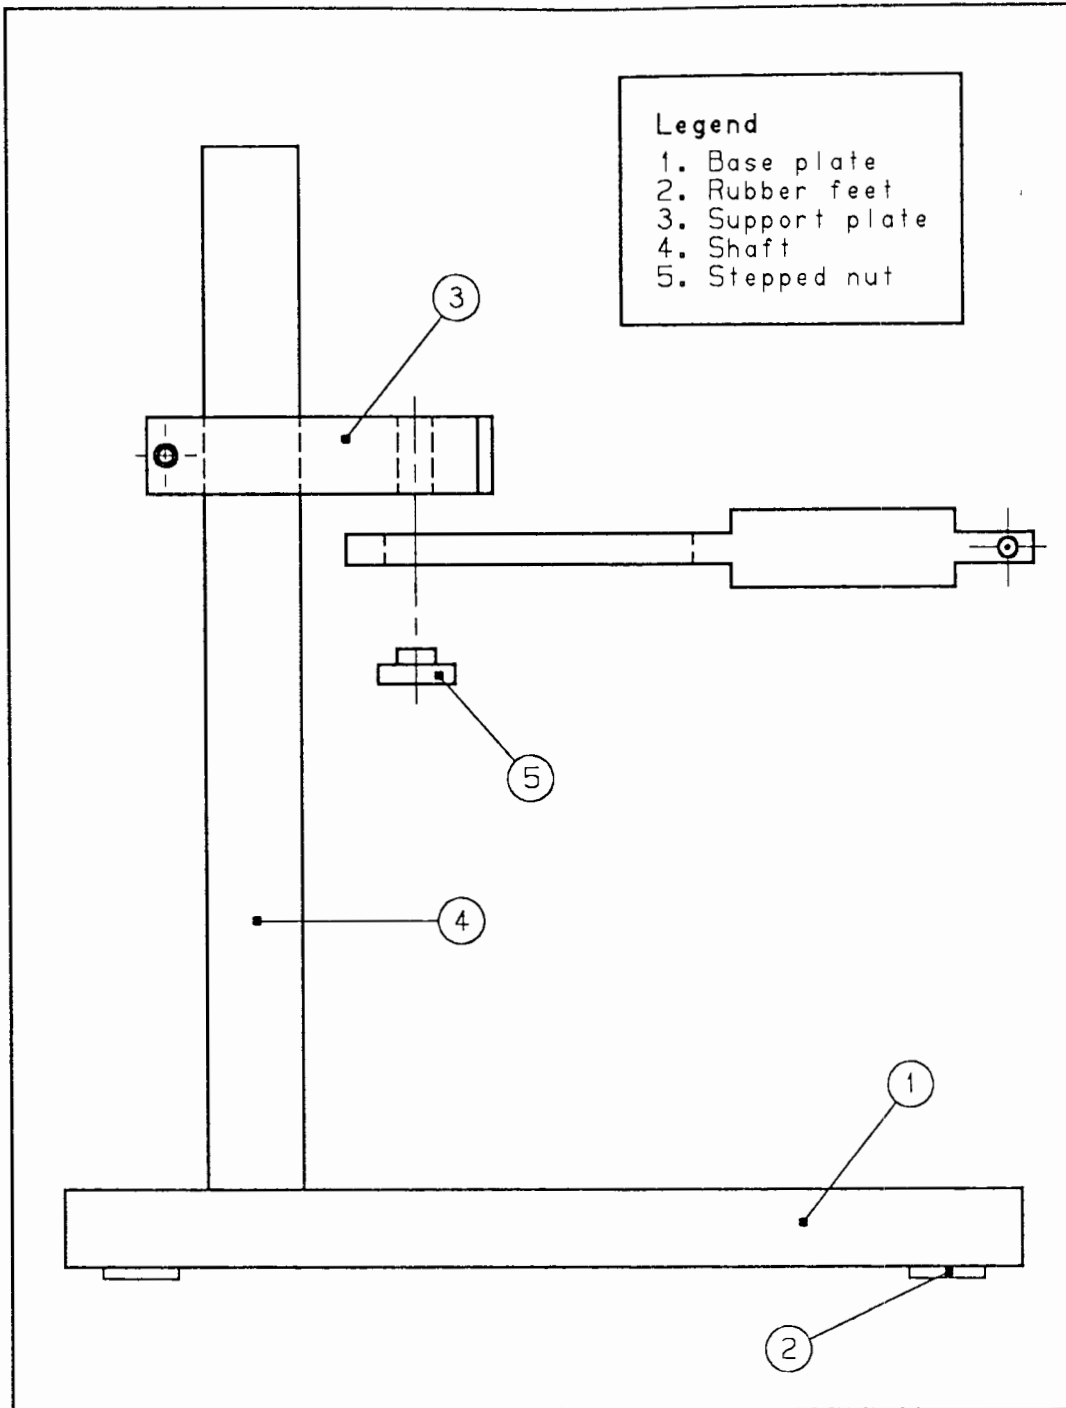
The stand arrangement used to hold the optical and drilling units.
